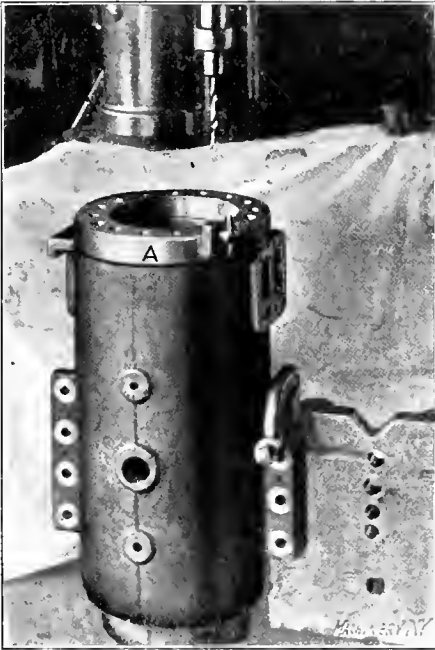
Drilling and Tapping the Cylinder Head Stud Holes
